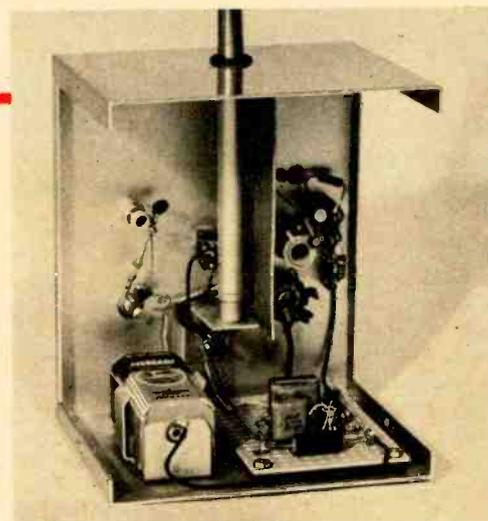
Antenna hole is 1 3/8 in. back from front of cabinet. Put grommets between board and bottom of cabinet. Put tape on cabinet under board.
